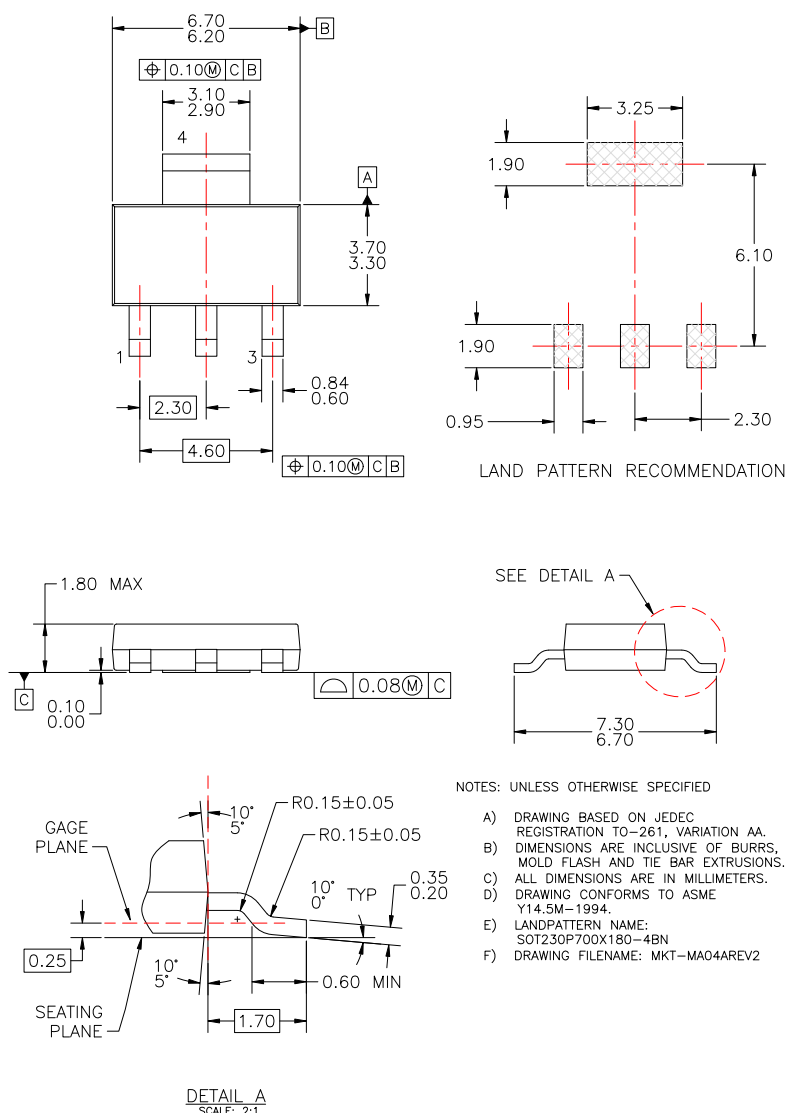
MOLDED PACKAGING, SOT-223, 4-LEAD (ACTIVE)
